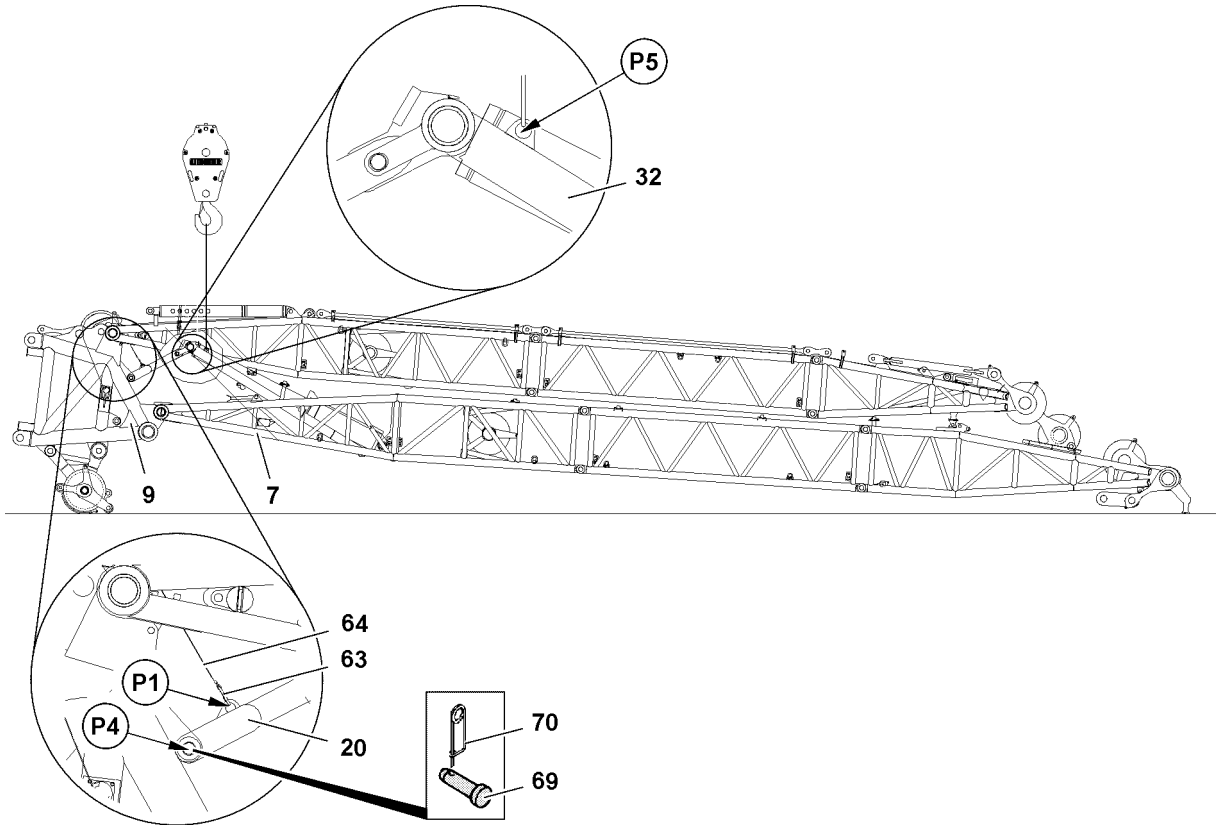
Remove the retaining frame on the W-connector head - remove the retaining frame on the W-connector head
